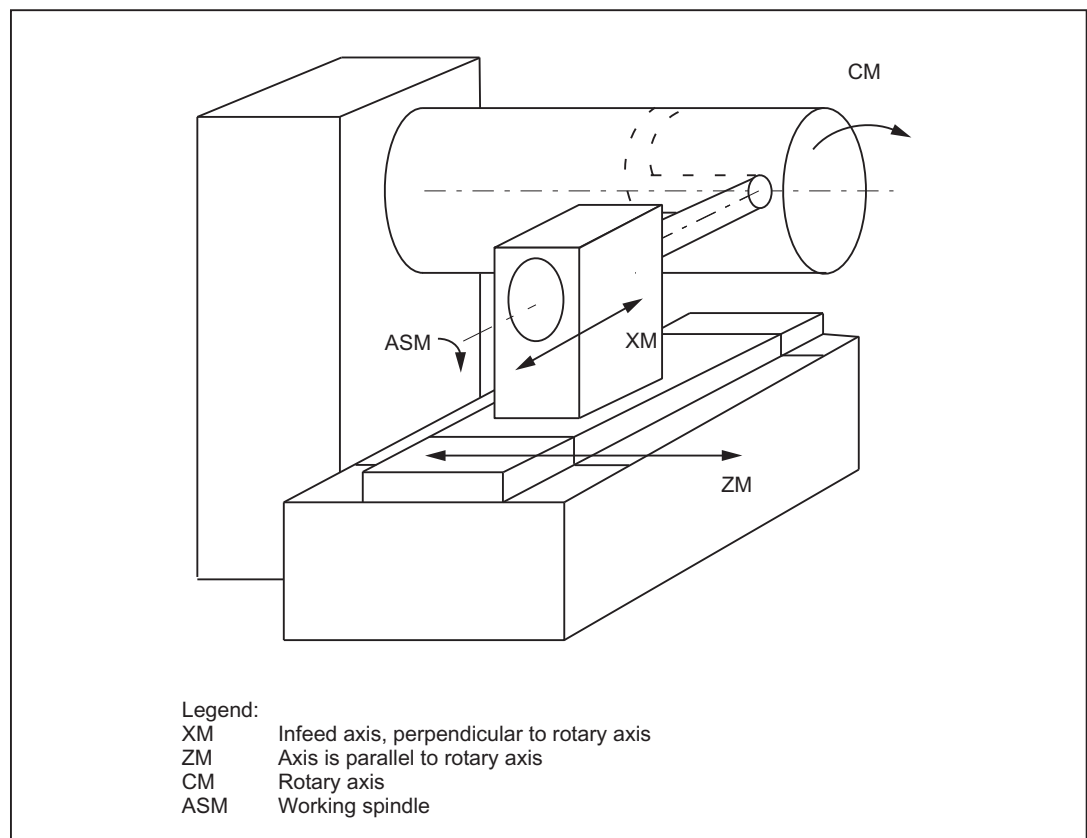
Machining grooves on a cylinder surface with X-C-Z kinematics
